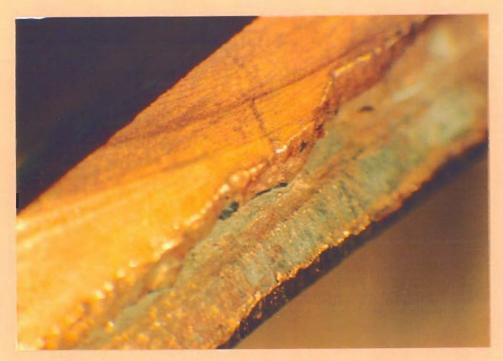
Another View of Incomplete Fusion in Circumferential Weld
